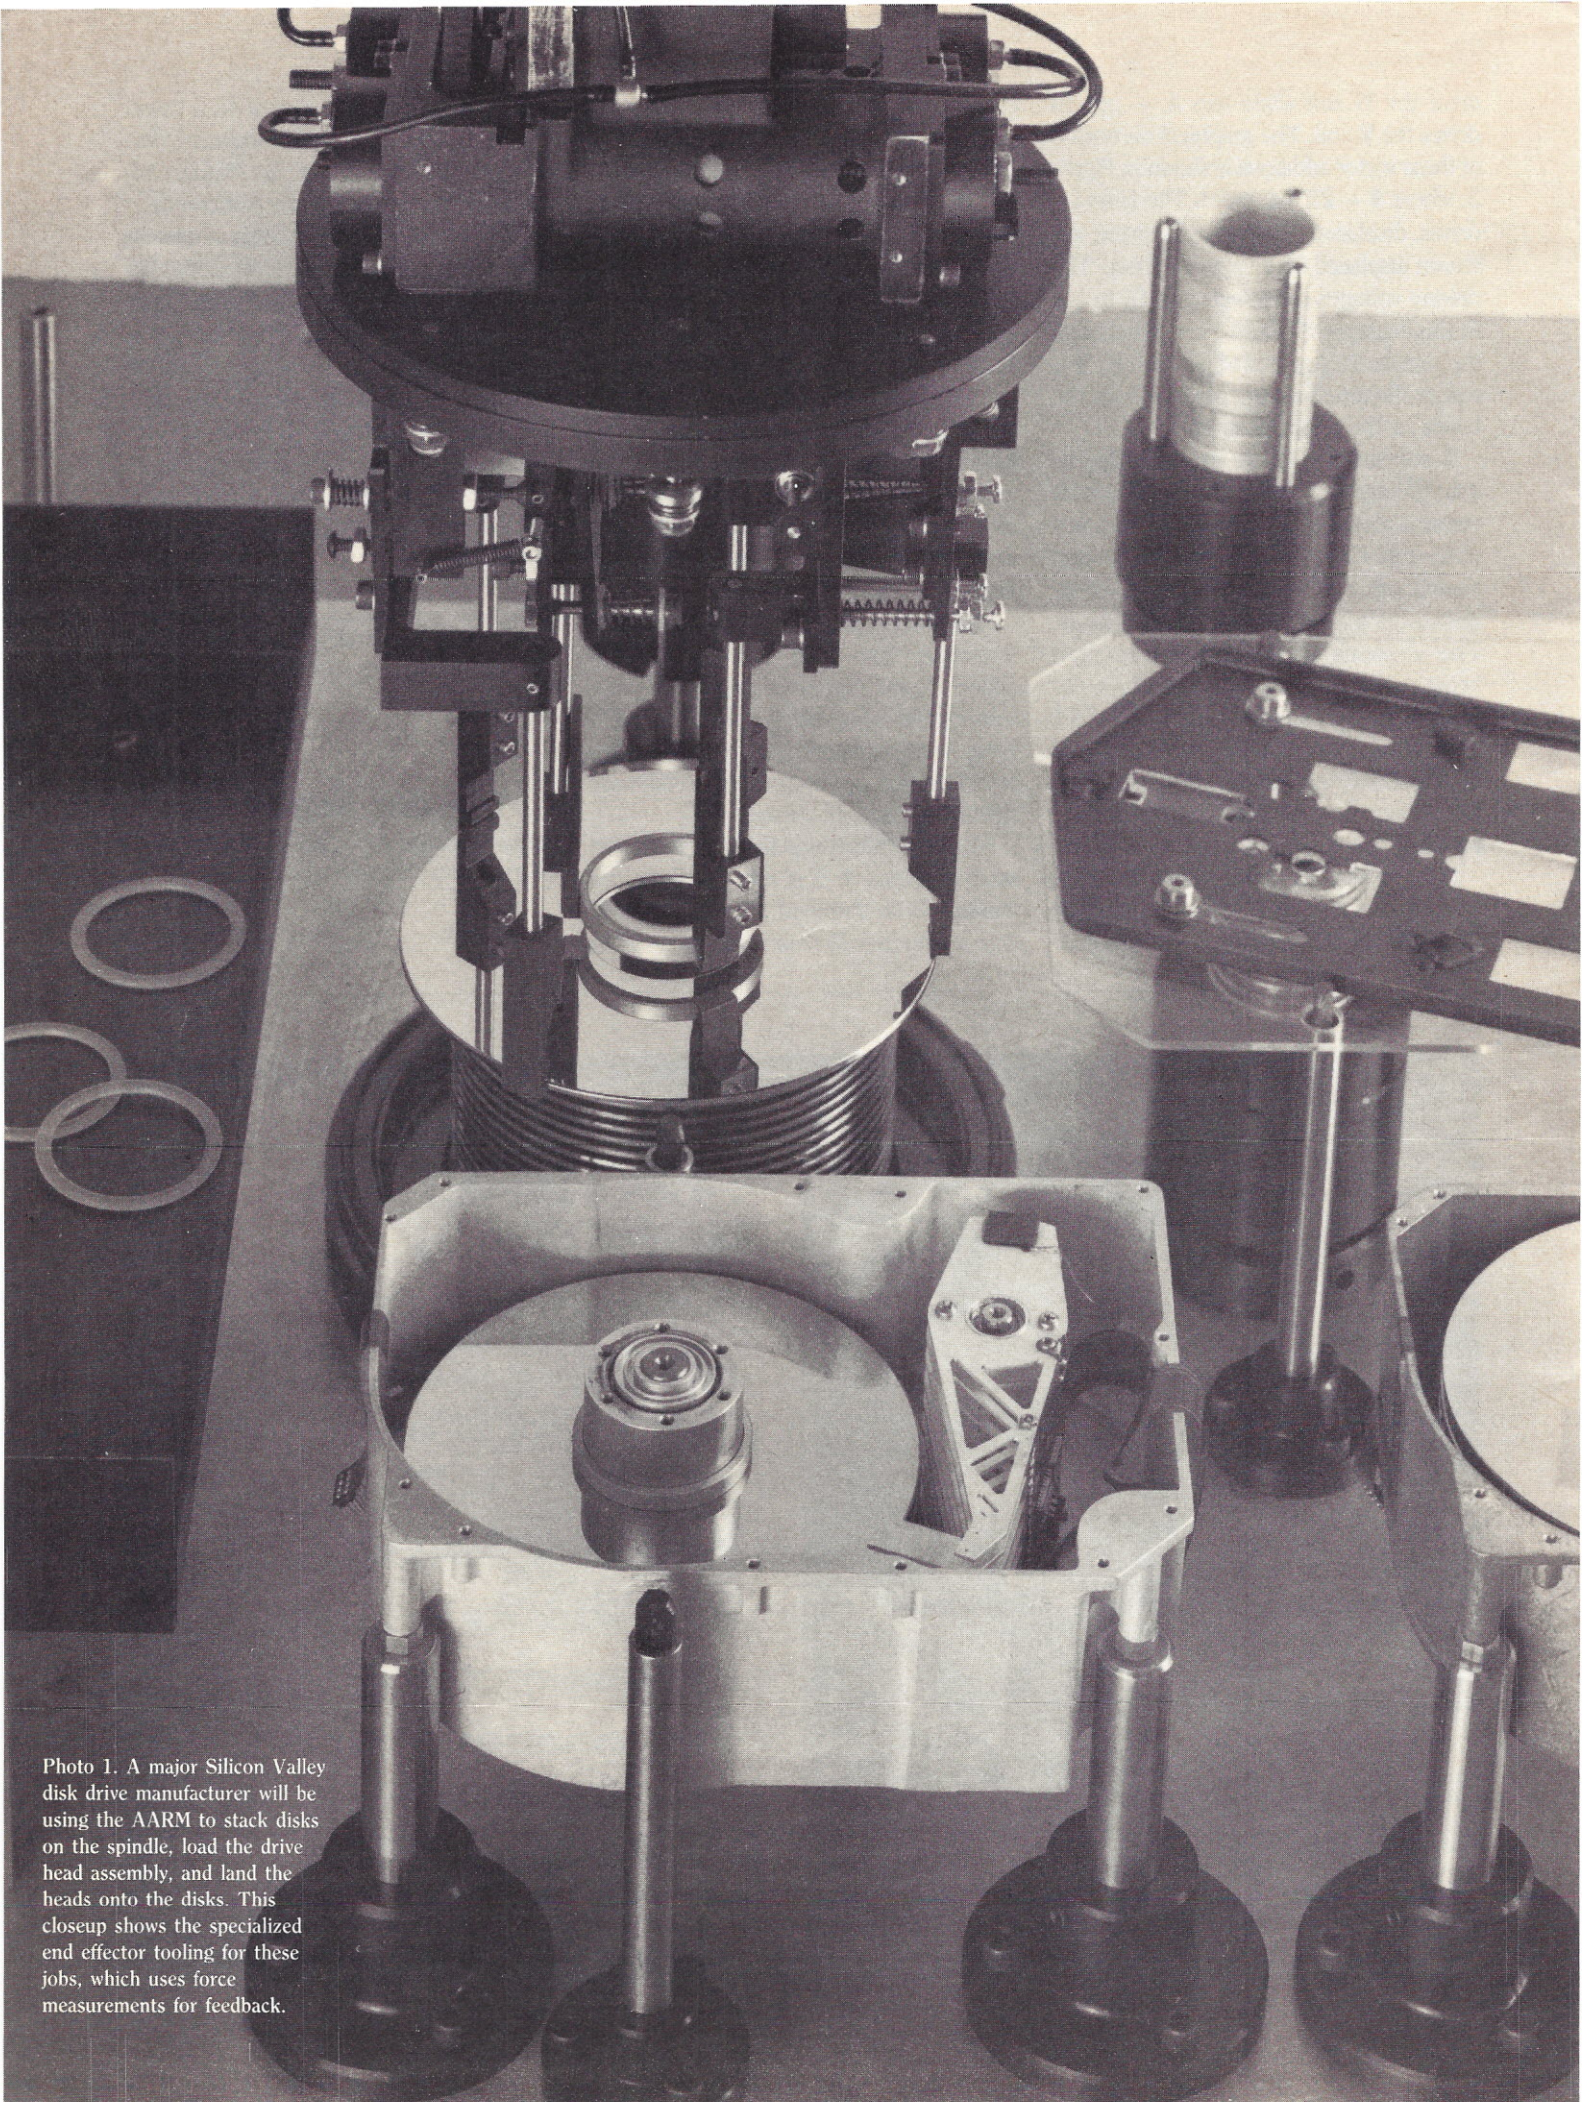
A major Silicon Valley disk drive manufacturer will be using the AARM to stack disks on the spindle, load the drive head assembly, and land the heads onto the disks. This closeup shows the specialized end effector tooling for these jobs, which uses force measurements for feedback.
